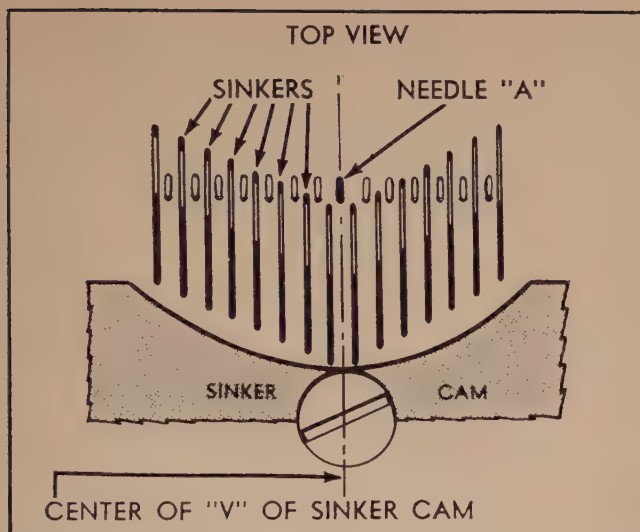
Locating Needle A (top view showing position with relation to sinker cams).
